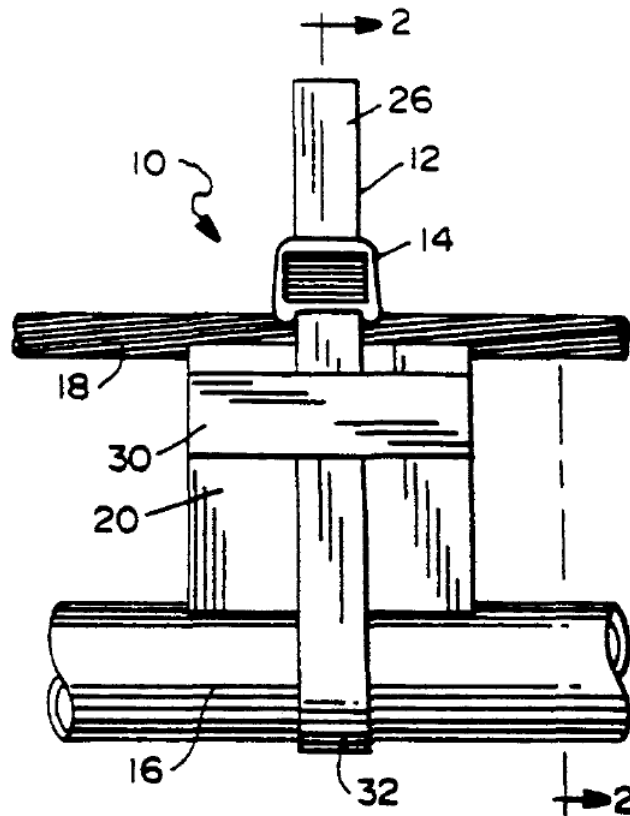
of Dyer shows a side elevation view of a cable or bundle tie assembly 10 “shown in use securing a large telecommunications cable and a spacer, to a stranded metal support cable.”
